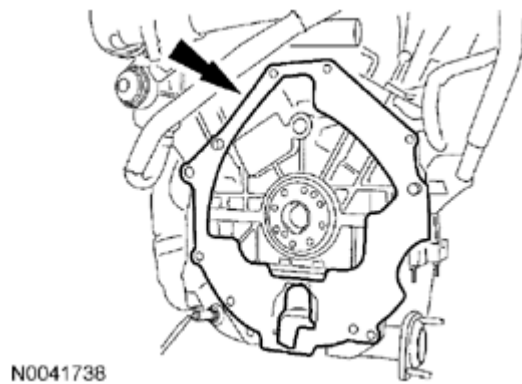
Locating Engine-To-Transaxle Separator Plate
